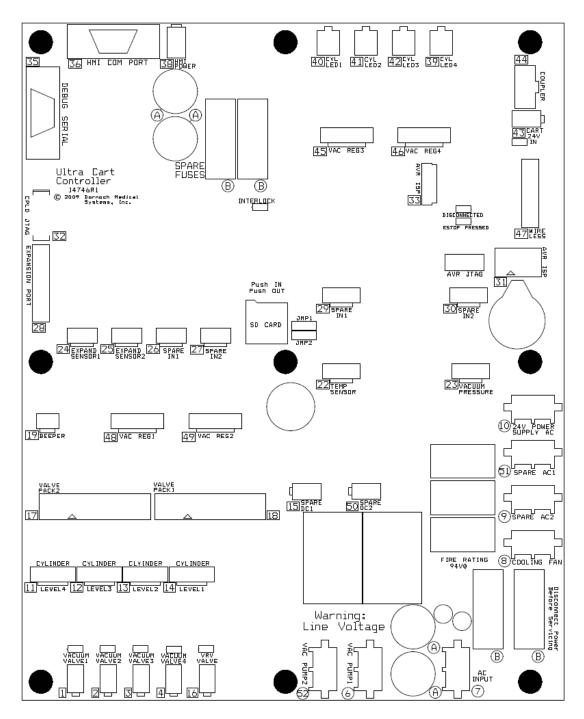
Ultra Fluid Cart Mother Board Schematic
